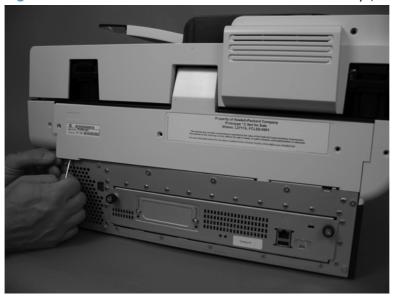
Remove the flatbed scanner and ADF assembly (2 of 7)
